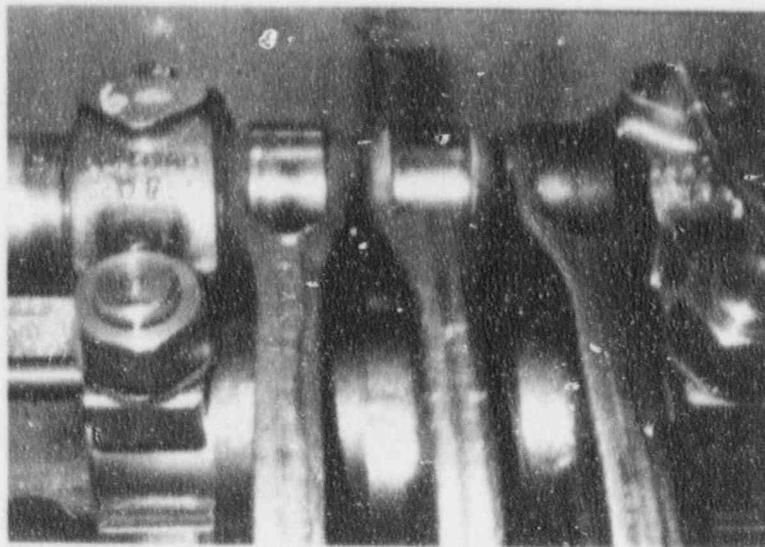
View of the left rear top deck and bearing blocks number 5 and 6 which correspond to cylinder number 18. Note, the lack of lubrication damage and discoloration of the rocker arm rollers, and the charred material sprayed on the top deck.
